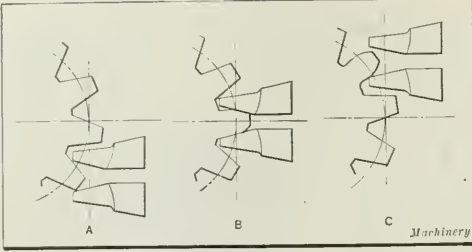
Diagrams showing the Manner in which Gear and Planing Tools roll together
